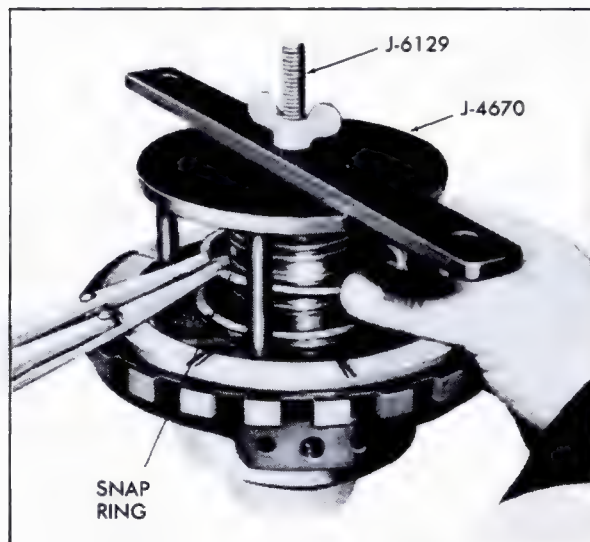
Removing and Installing Intermediate Clutch Piston Snap Ring
